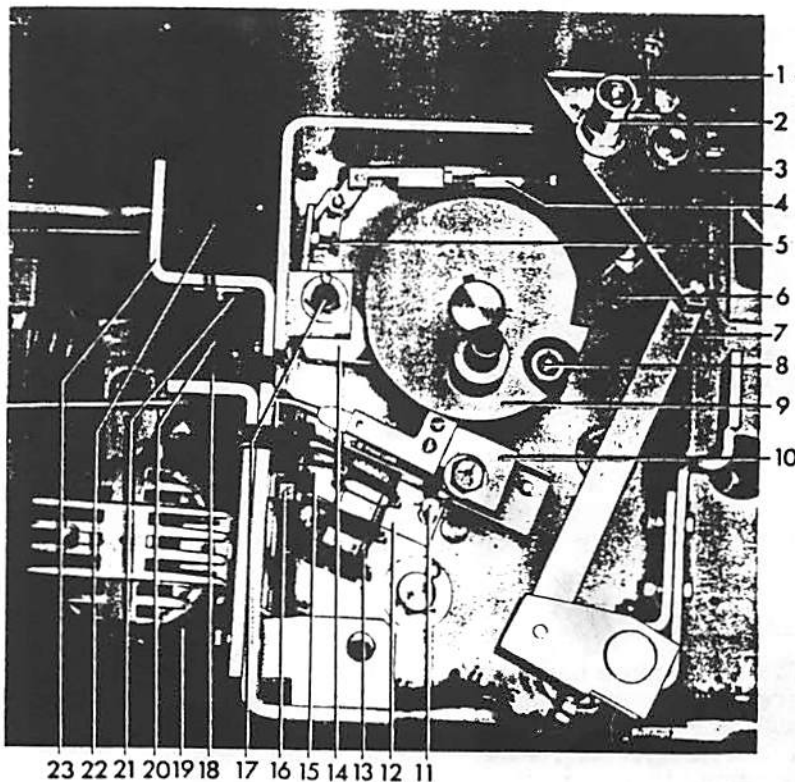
(8037379) Control Mechanism and Spring Discharge Link
